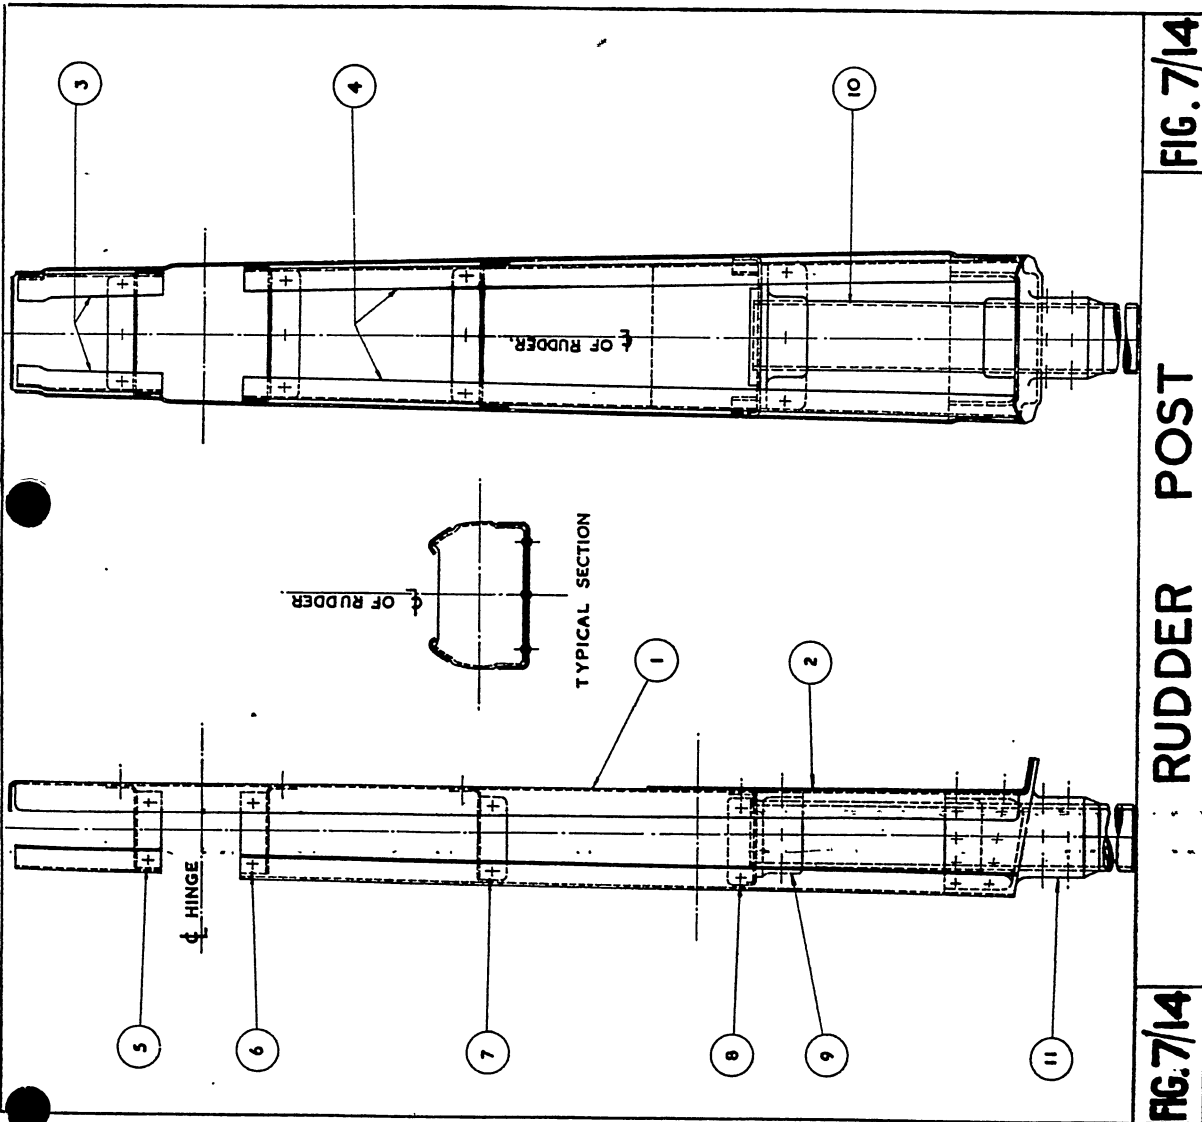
/14 R U D D E R P O S T FIG. 7/14
